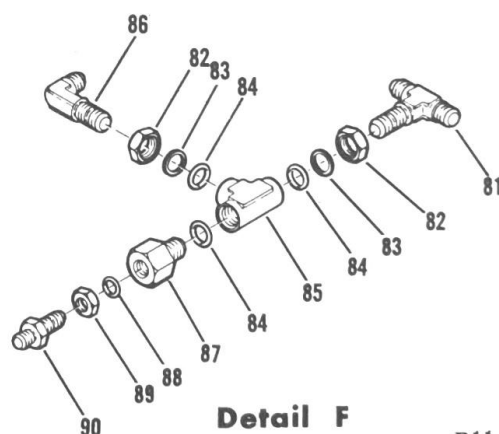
Nose Section Hydraulic Installation (Sheet 1 of 2)
